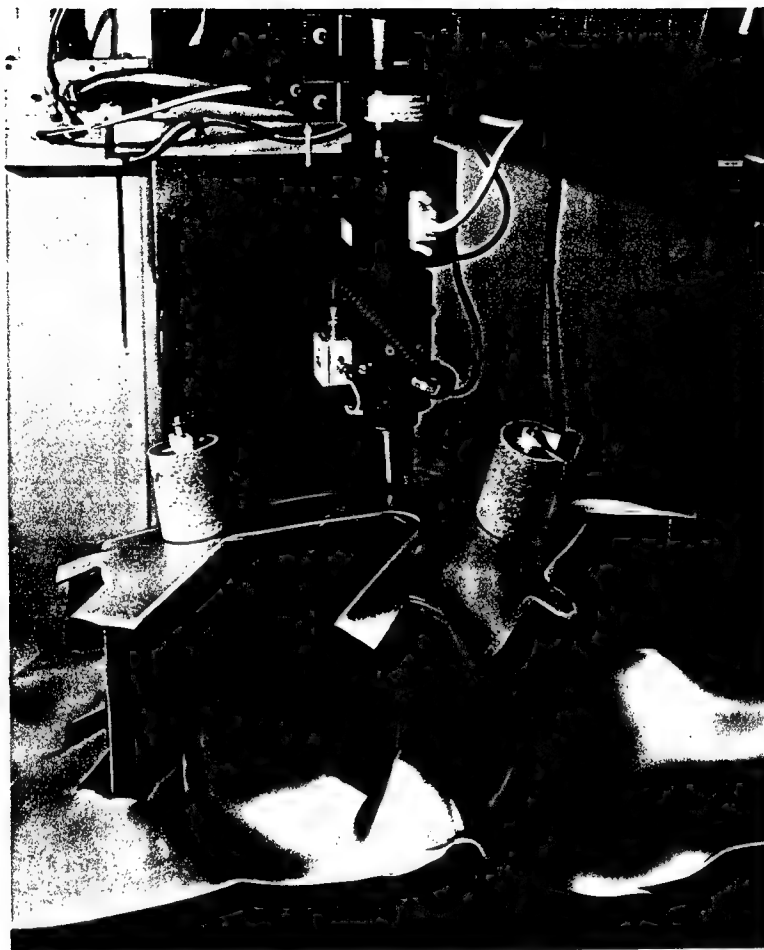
Boeing 737 part being held in place by portable superconducting clamps during a laser cutting operation.
